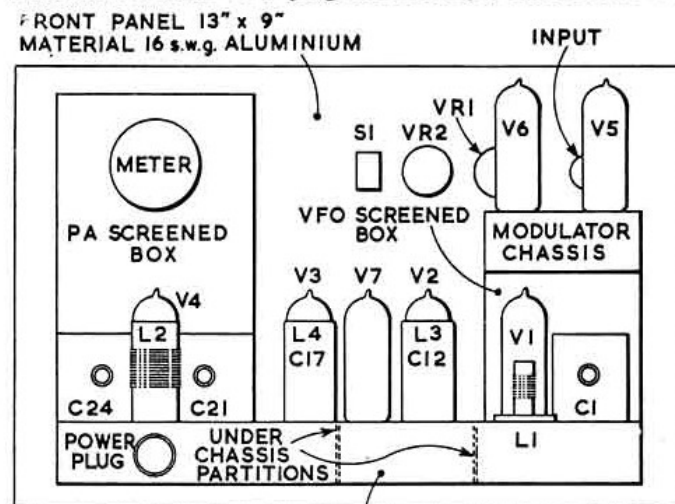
Rear view of the chassis layout with the screening covers removed.
